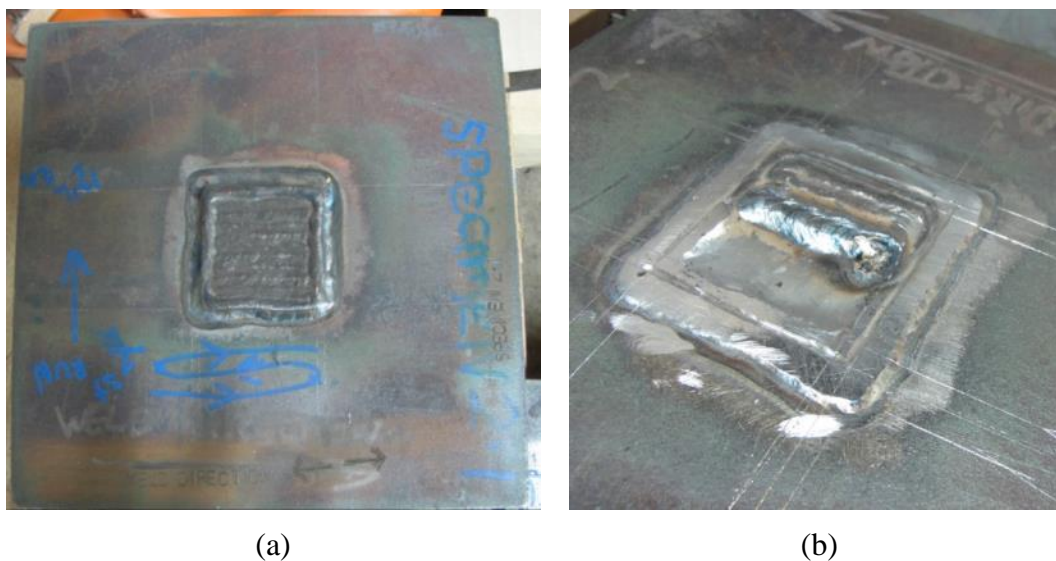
Pad repair welds, where (a) Completed pad repair weld and (b) second repair weld where the first pad weld was ground and dished-out the middle part.
